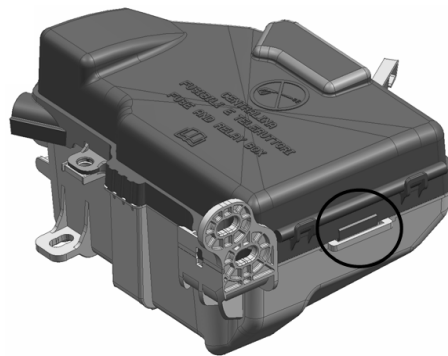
A 3D model of a fuse box, together with indicated latch mounting the box cover
